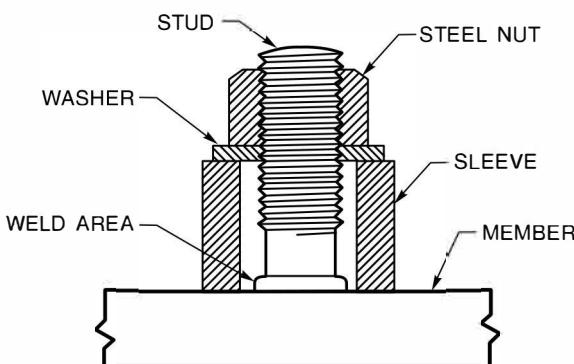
Typical Tension Test Fixture (see 9.3.2)
